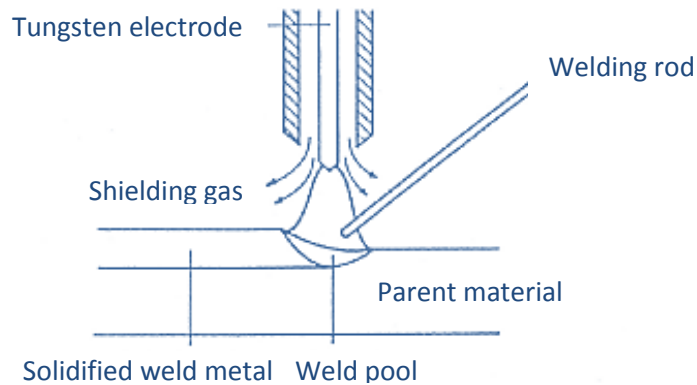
schematic drawing of GTAW process (Ouden & Hermans, 2009). The tungsten electrode can be seen to make an arc between the parent material and the electrode. The welding rod is used to add weld metal to the weld pool.
